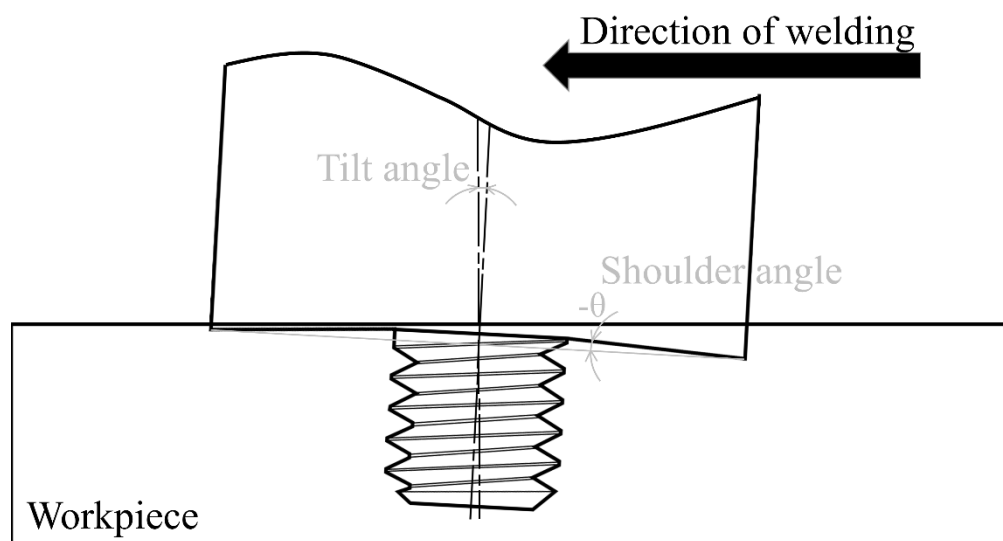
Schematic illustration of friction stir welding tool used in our studies
